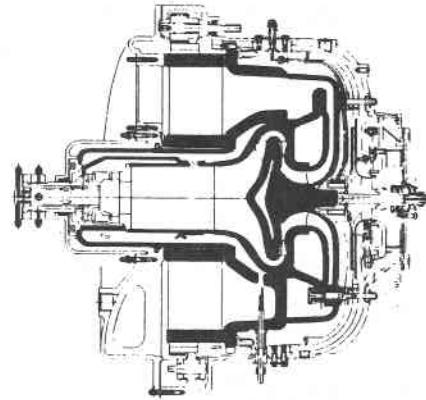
AGT101 Mod I, Build 1 Metal Castings.
